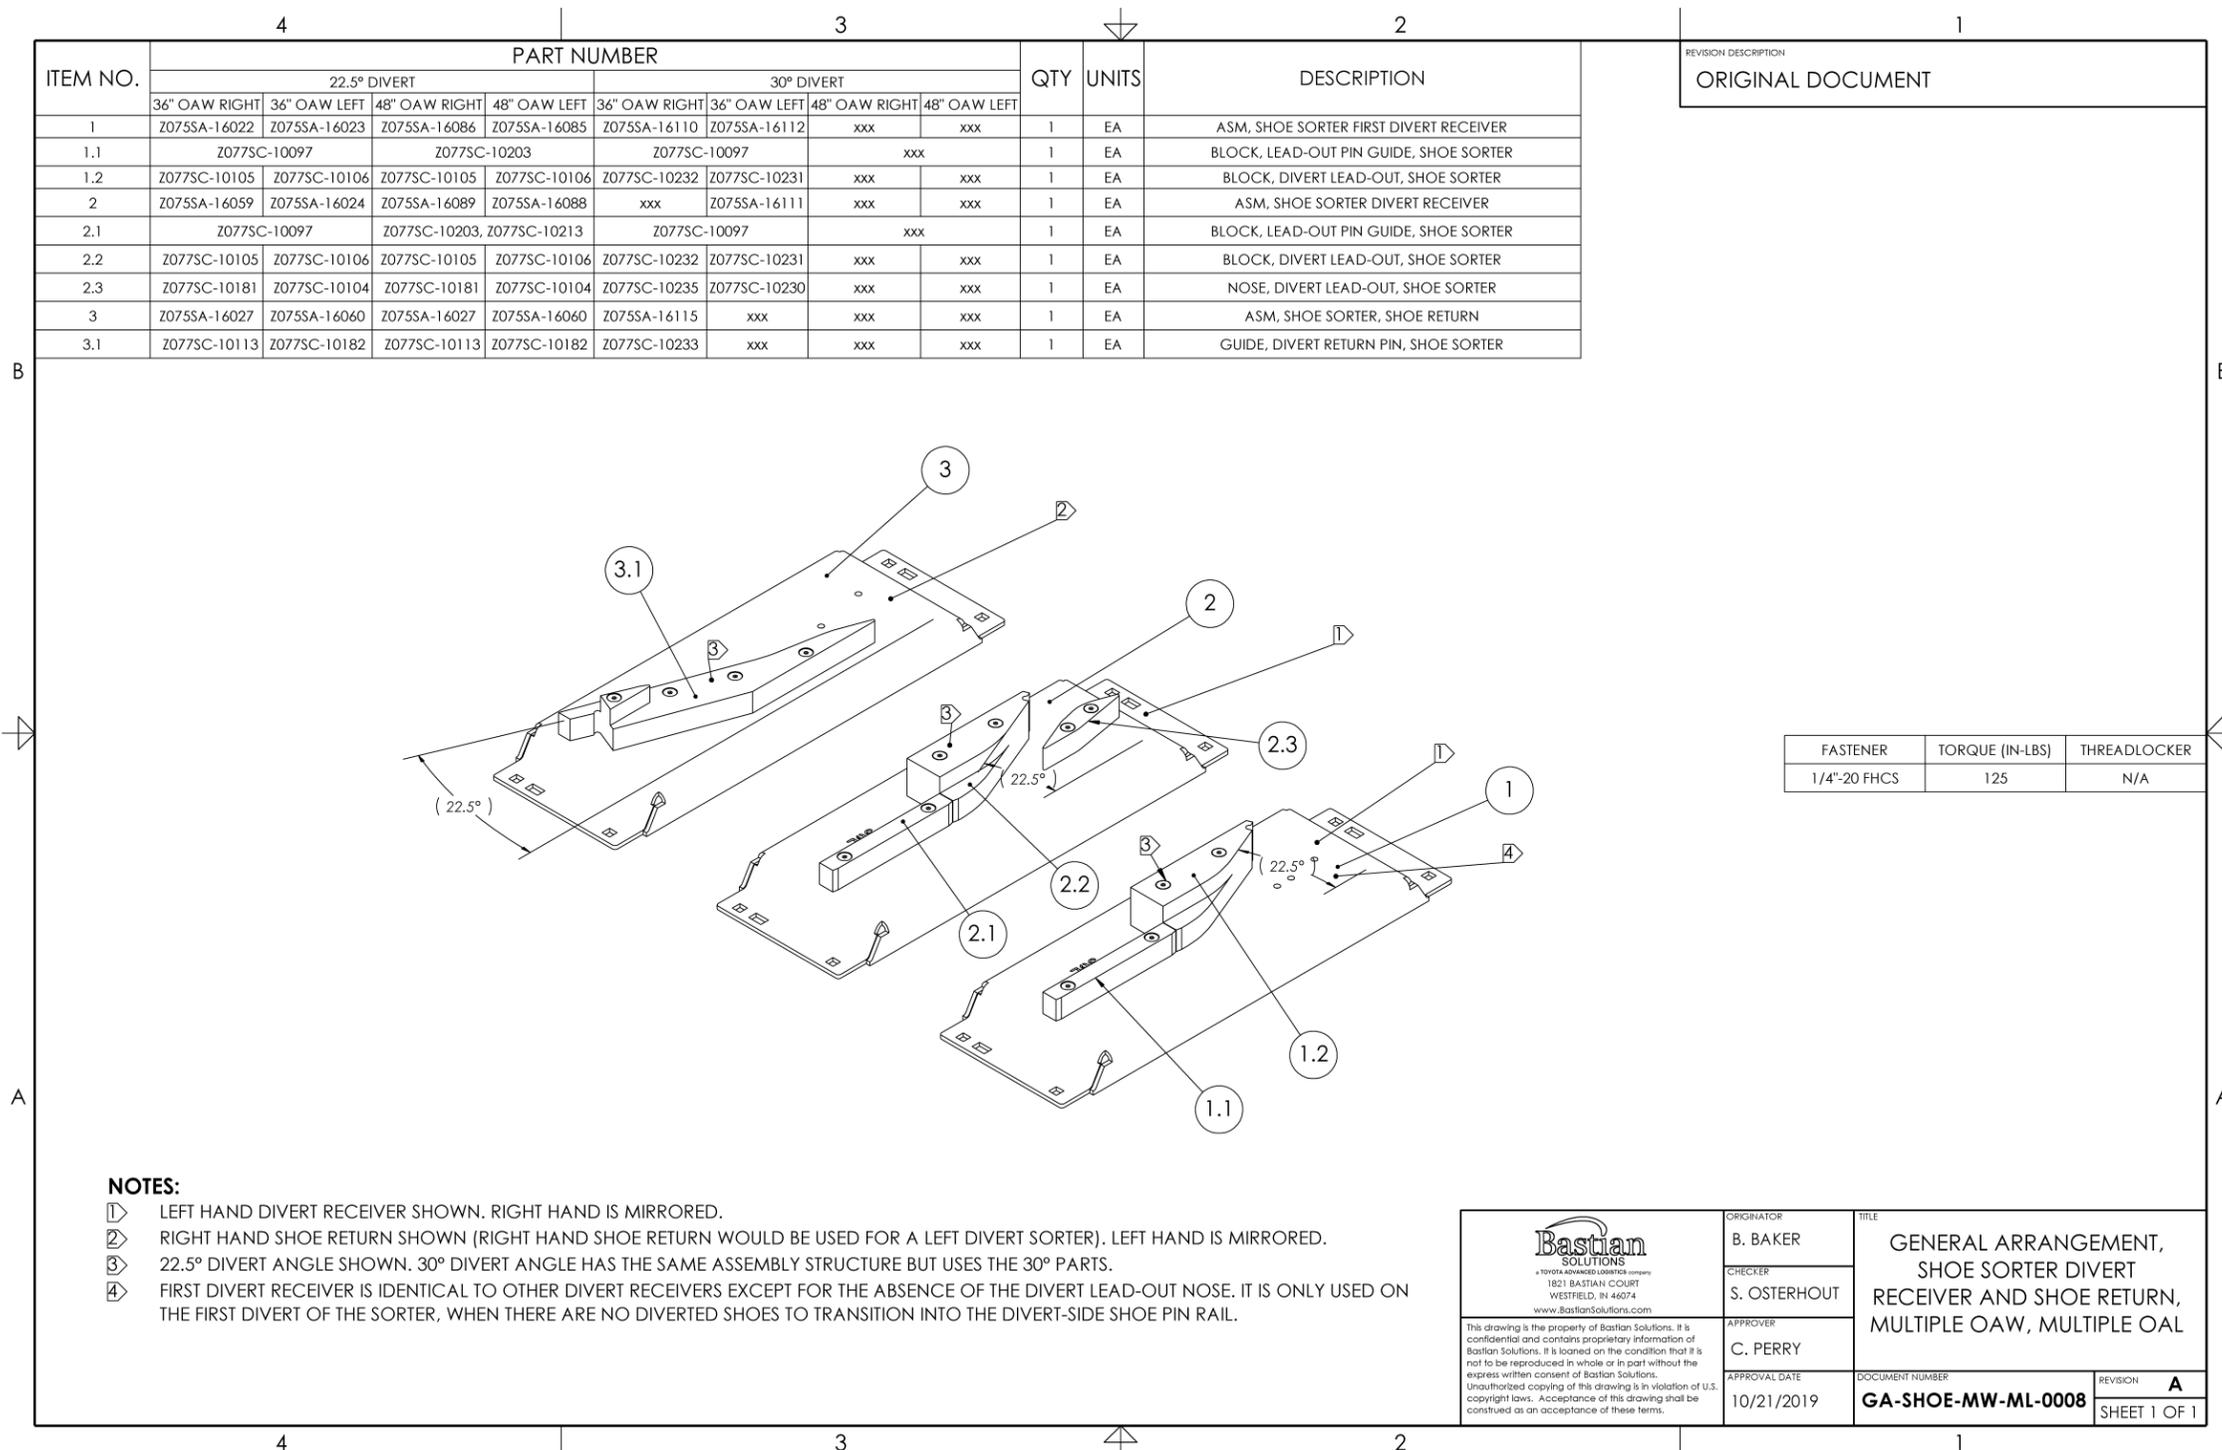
General Arrangement, Shoe Sorter Divert Receiver and Shoe Return, Sheet 1 of 1
